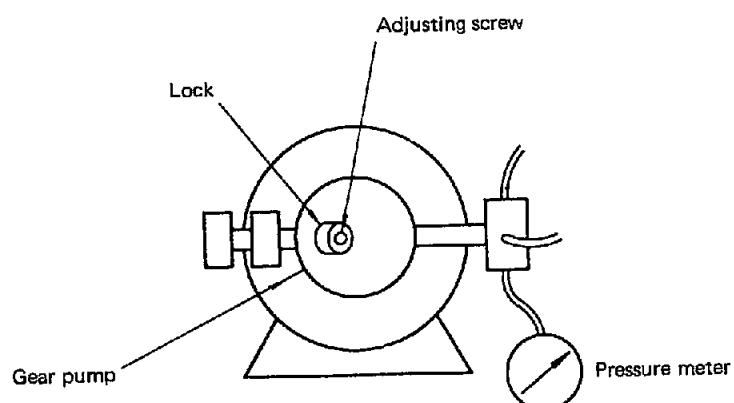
Adjustment of Gear Pump Pressure
